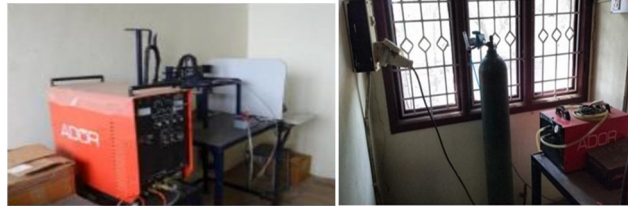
ADOR CHAMPTIG 300AD machine used for the welding process
